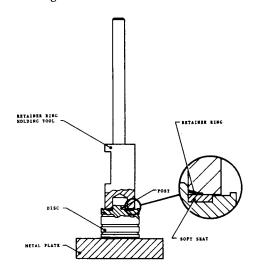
SOFT SEAT ASSEMBLY FOR 1541, 1543 & 2471
